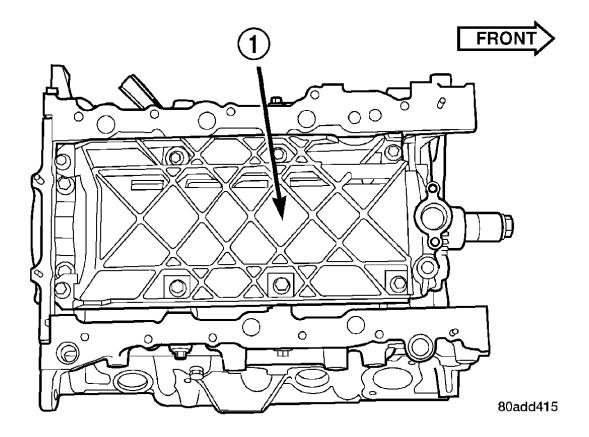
Identifying Windage Tray Courtesy of CHRYSLER LLC
